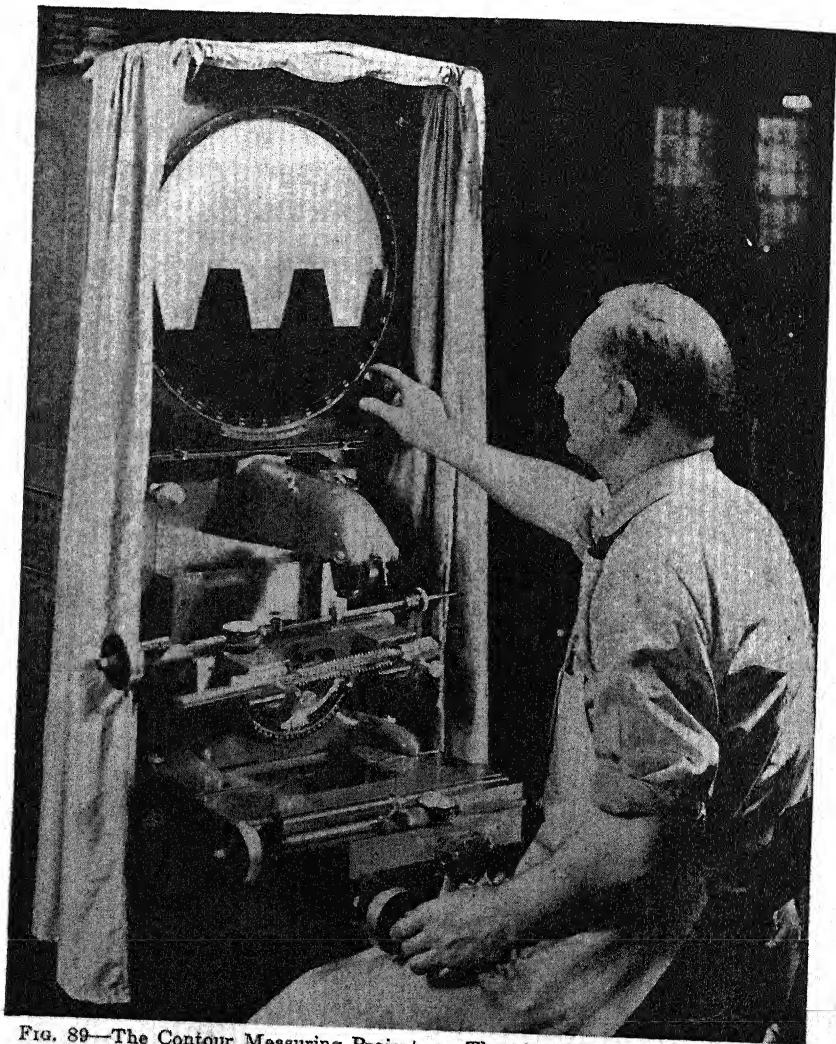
The Contour Measuring Projector. The view before the operator is an enlargement of the teeth on a machine tool.
